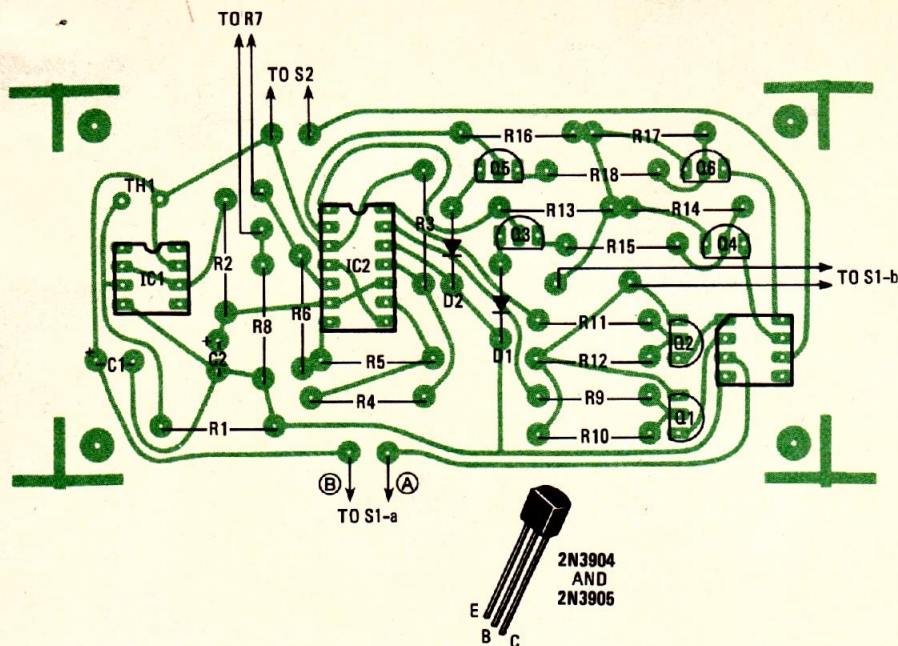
PARTS PLACEMENT DIAGRAM for the thermostat. Unmarked 8-pin (or 1/2 16-pin) socket at lower right is for DIP plug connecting thermostat with the Control Center.
